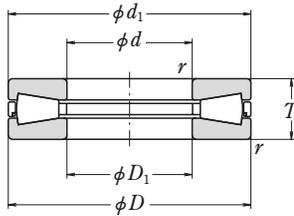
Thrust Tapered Roller Bearings in a Heavy-Duty Extruder
